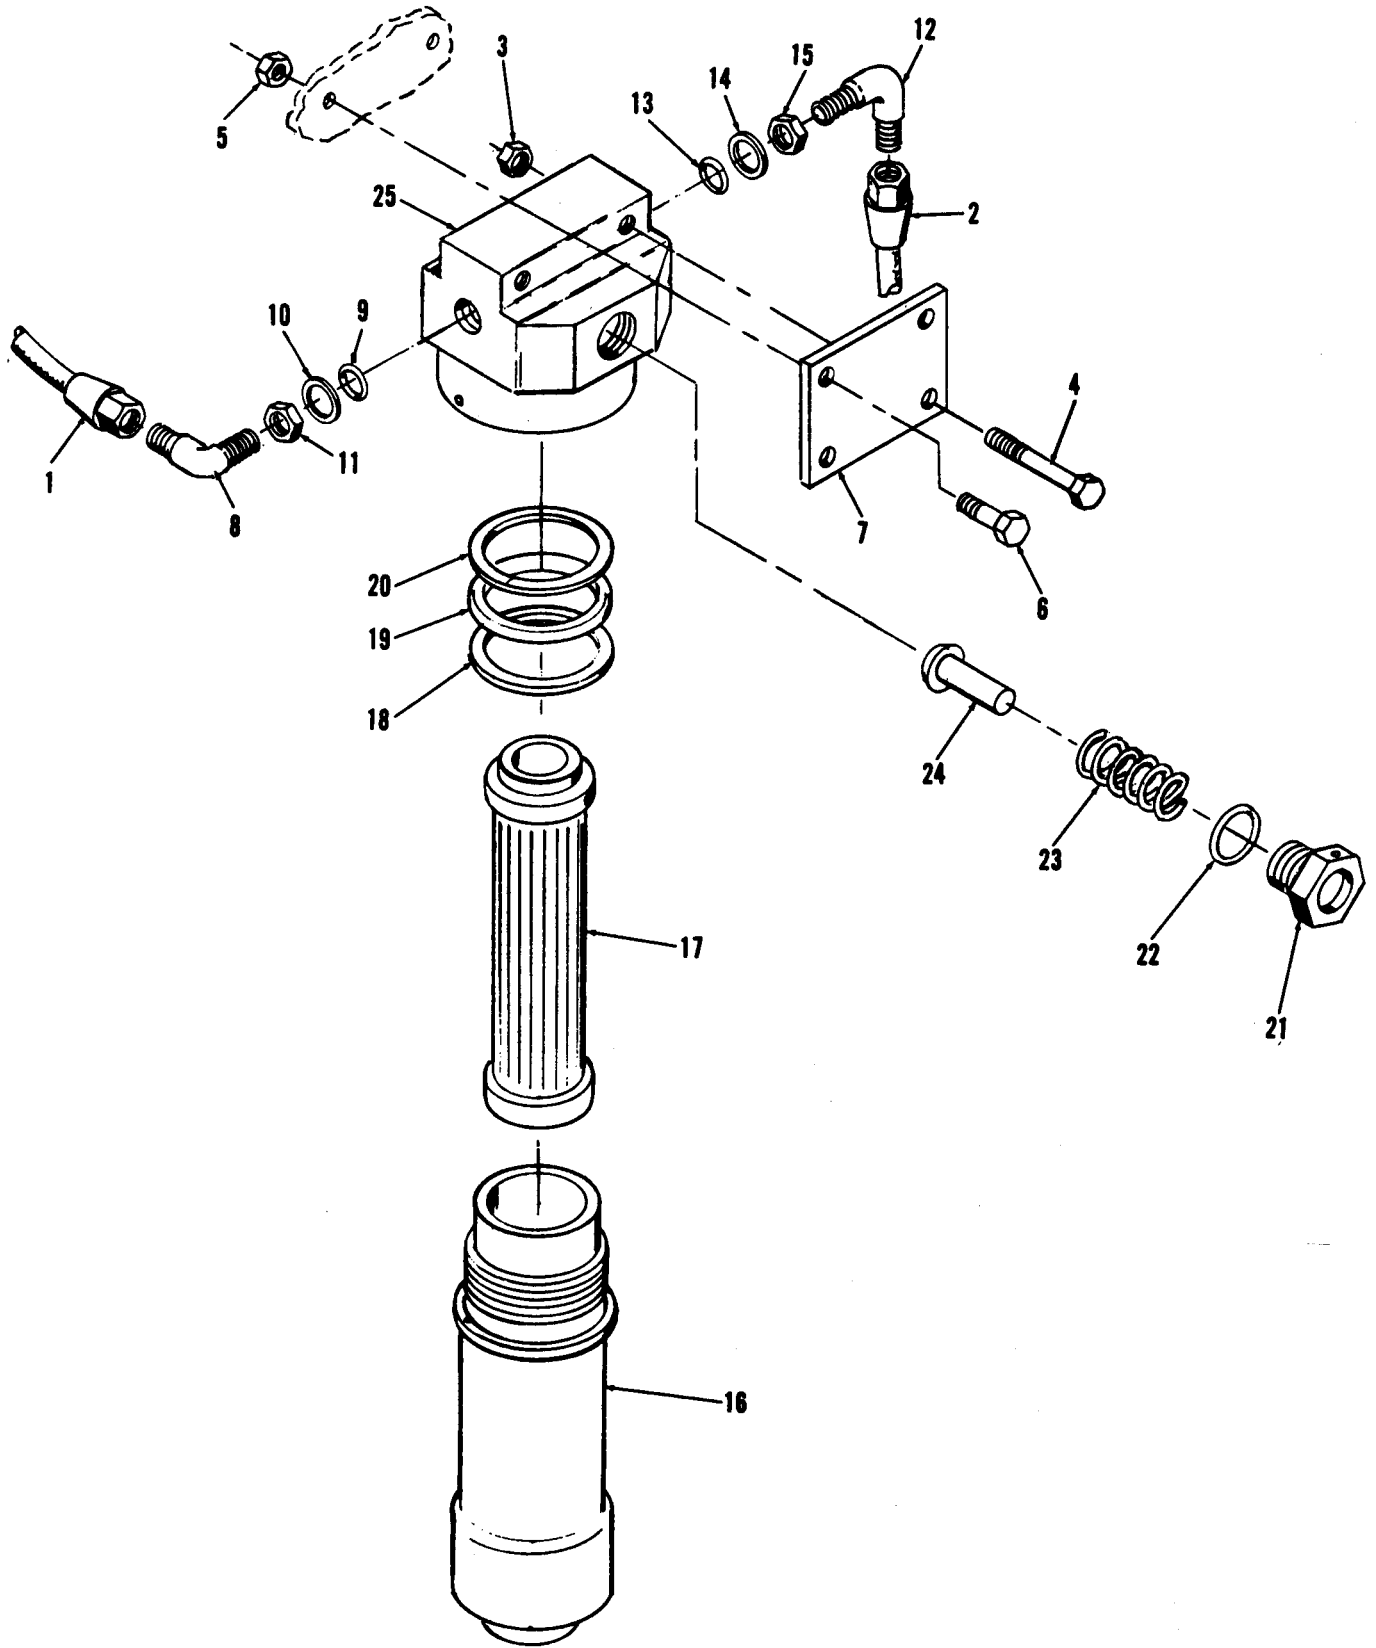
Hydraulic filter (precise generator sets), exploded view
